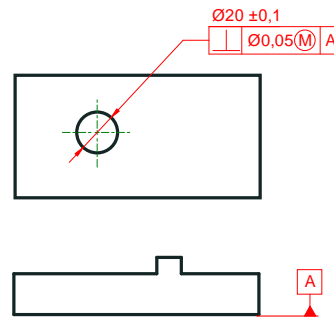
The diameter of the full-form cylindrical plug gauge shall be as follows:
